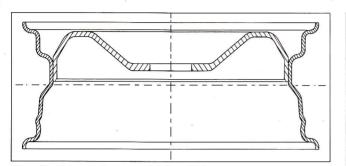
Wheel produced by an extruded rim welded to a pressed disc.
